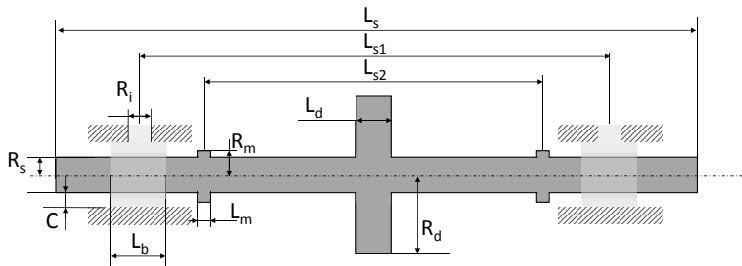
Dimensions of the Laval rotor on plain journal bearings.
